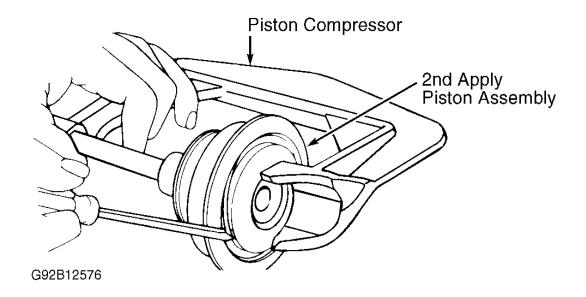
Compressing 2nd Apply Piston Courtesy of GENERAL MOTORS CORP.
